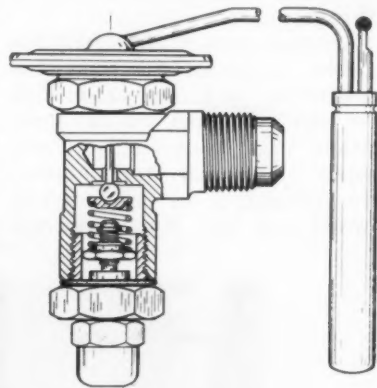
Exploded view drawing of valve, showing principal parts. Valve has only three moving parts—diaphragm, ball and rod, and spring.
